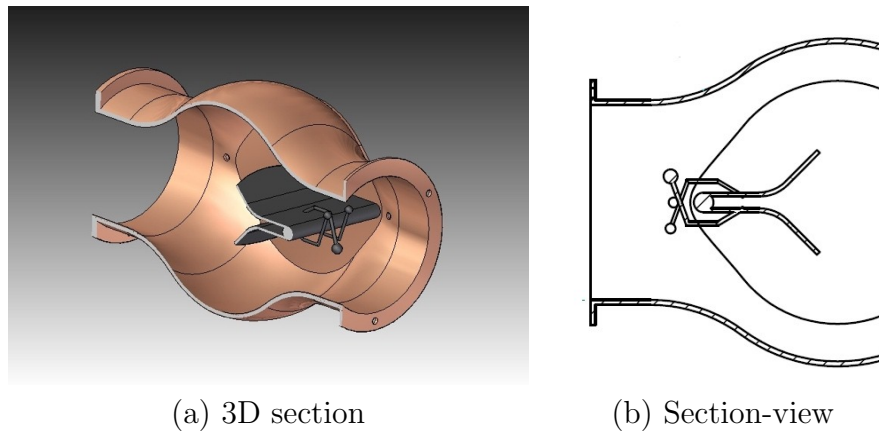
RDZ2 valve in a closed position (a) 3D section ; (b) Drawing section-view.
